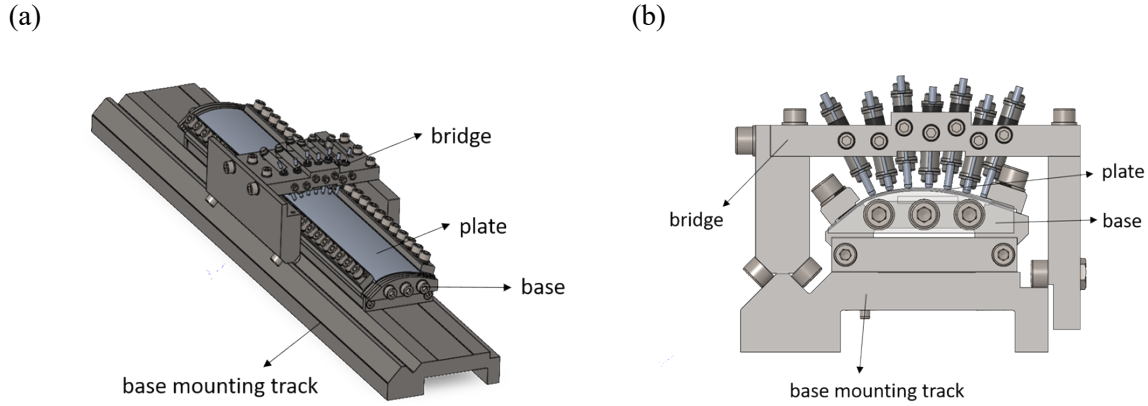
Model geometry: perspective view (a), and front view of the experimental assembly (b).
